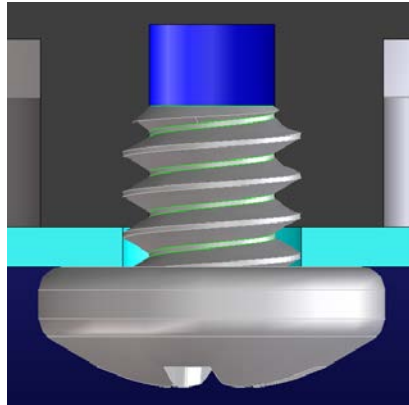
Bottom mount OEM hole, 6-32UNC X 1/8" (2.8 threads engagement)
